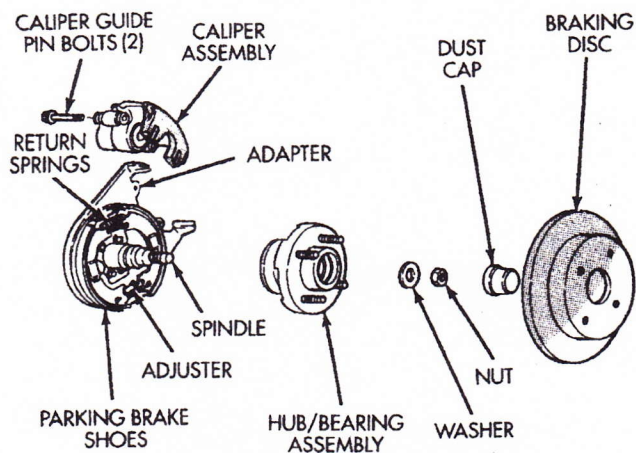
Typical parking brake that uses a drum built into the center of a rotor. Courtesy of Chrysler Corporation
